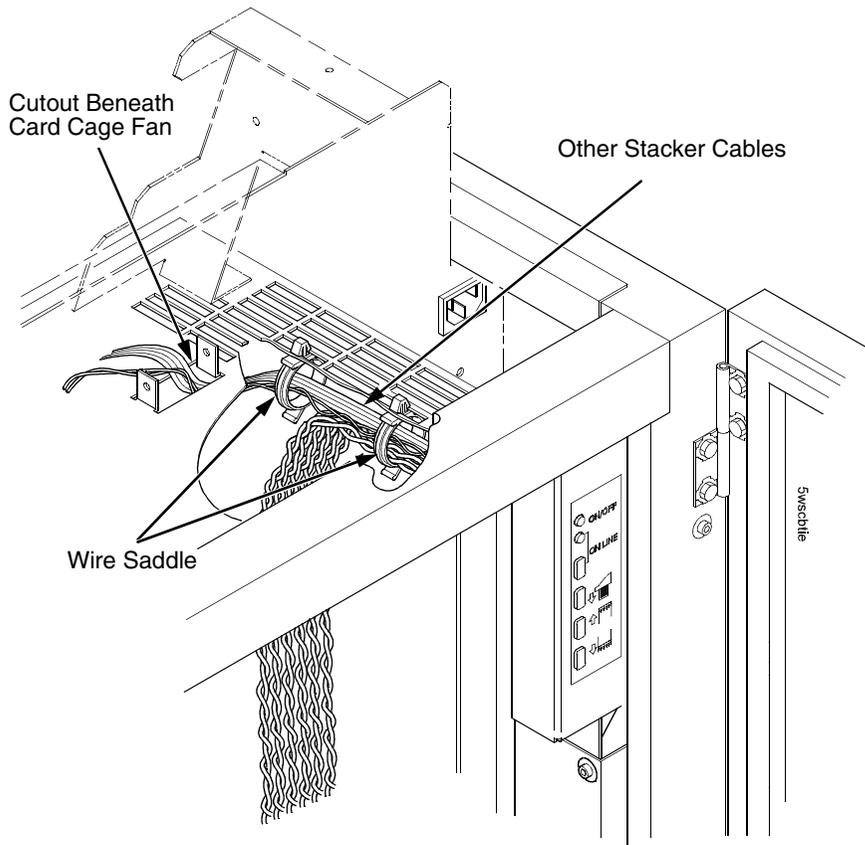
Securing Stacker Cables in a Printer With a PSA3 Controller Board
